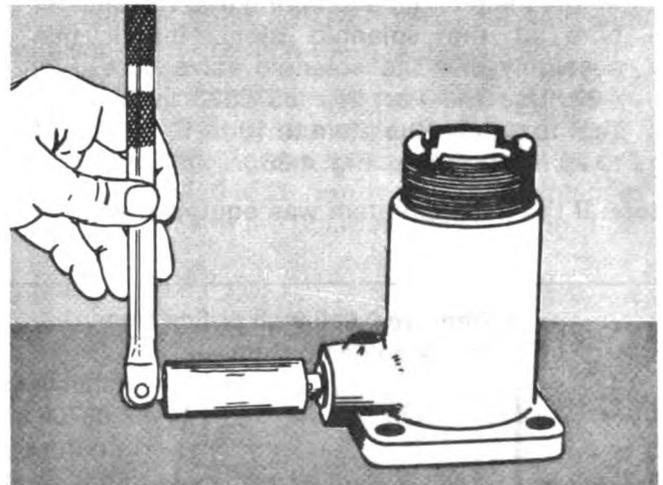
Tighten The Plunger And Spring Assembly.
